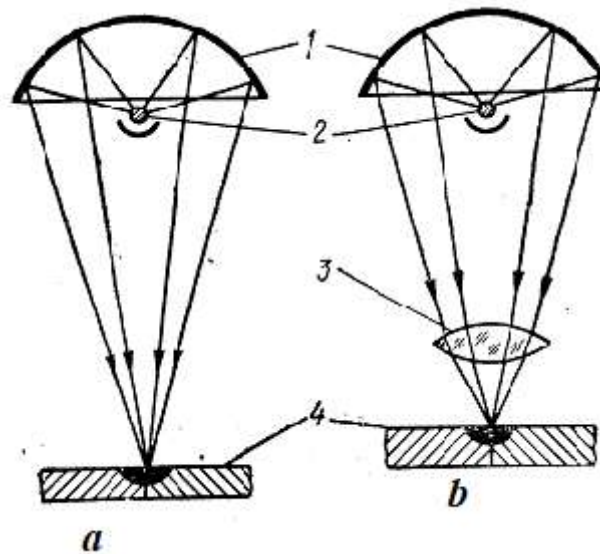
Schemes of optical systems for welding and soldering:
